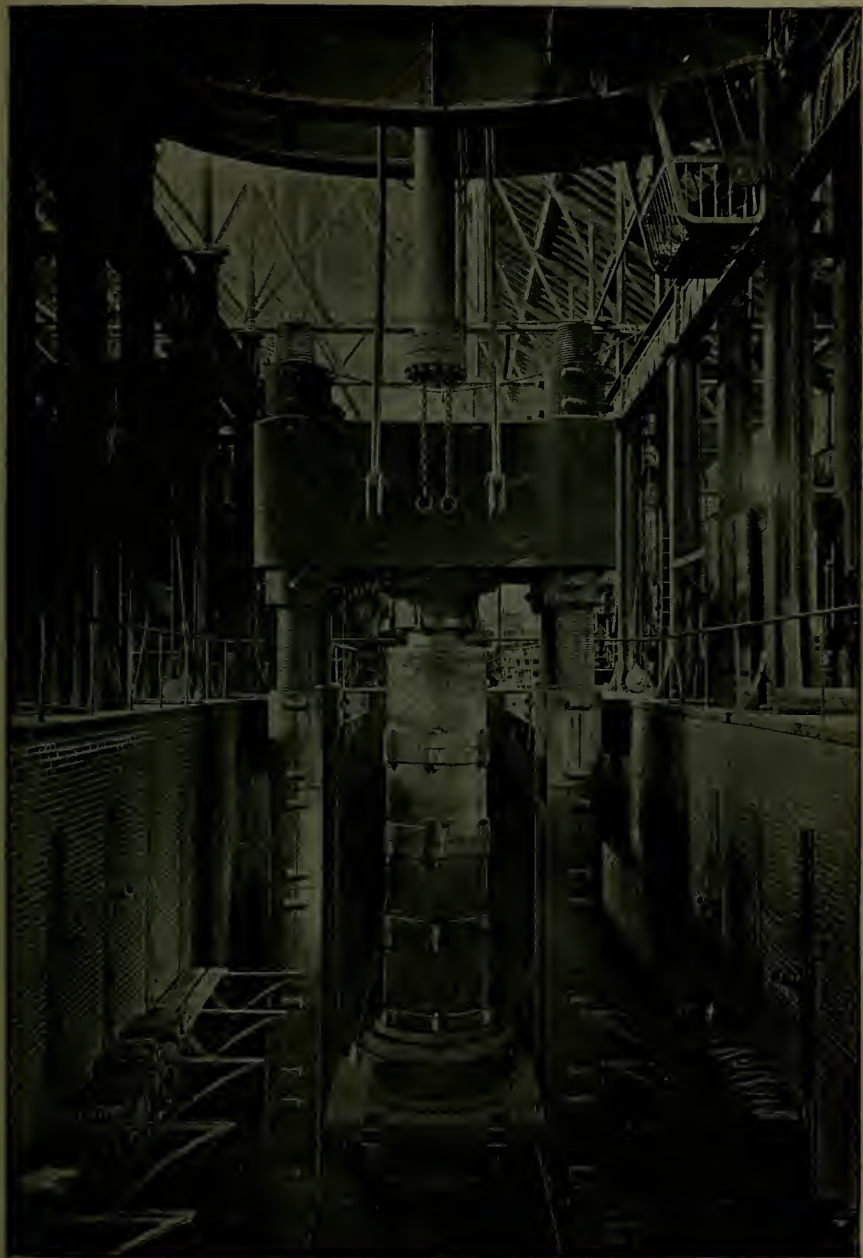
7,000-ton fluid-compression press, with ingot mould under press, Bethlehem Iron Company's Works.
